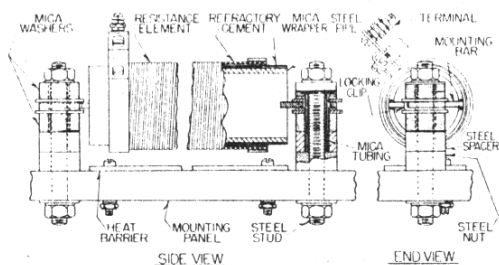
Construction of a Type TM Resistor Unit and its Mounting (Dwg. 5-C-2685)
